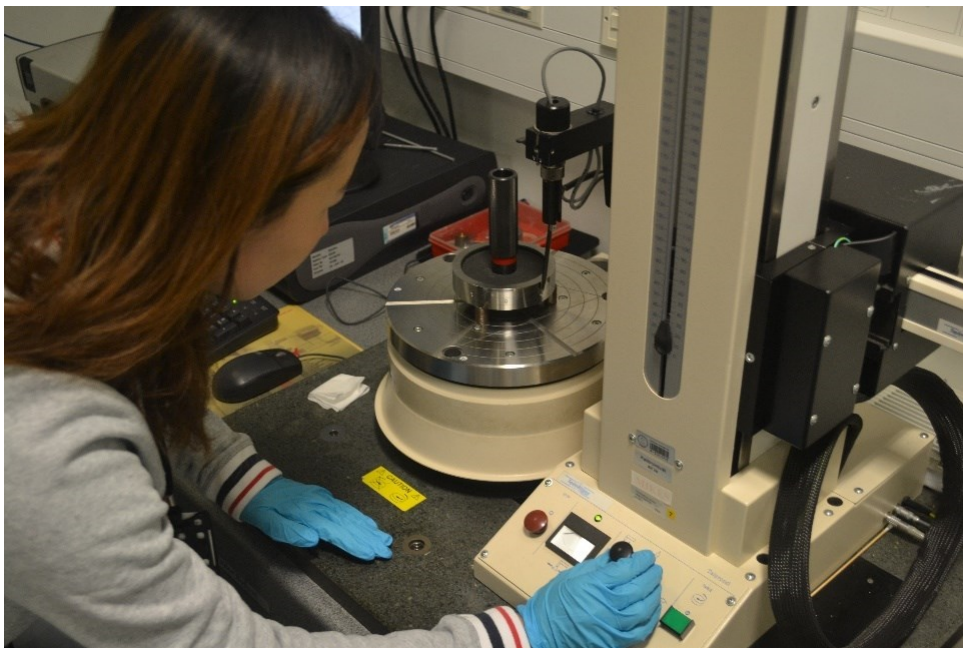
Adjusting the plug gauge to be coaxial with the rotary worktable.
